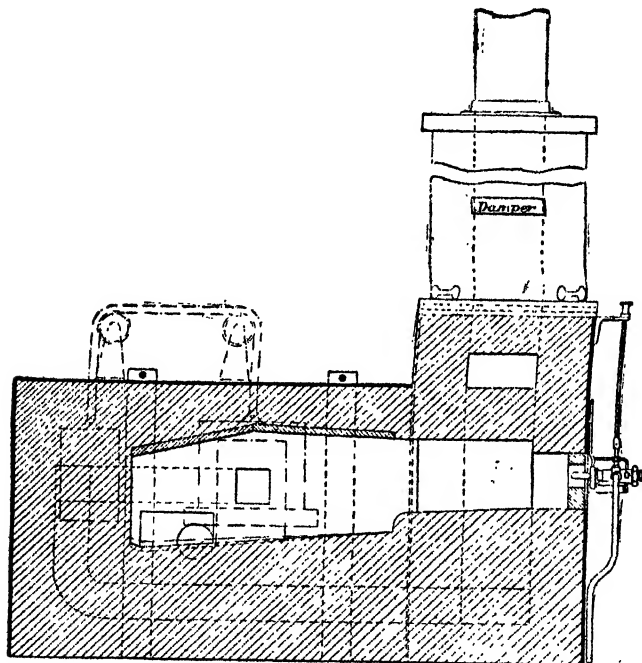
Longitudinal section of Holloway's smelting furnace.
